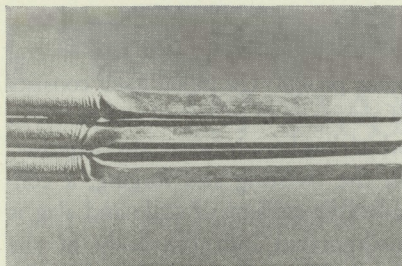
Damascus steel barrels were made with alternate strips of iron and steel. Each strip, above was twisted first from end to end.
